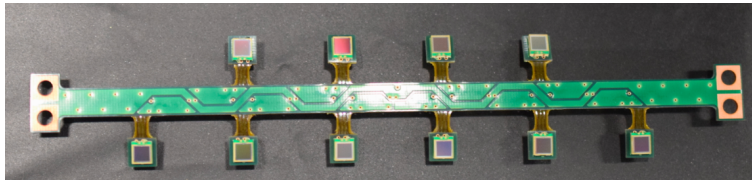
Ten MPPCs soldered on the PCB. The brown branches are flexible parts.
